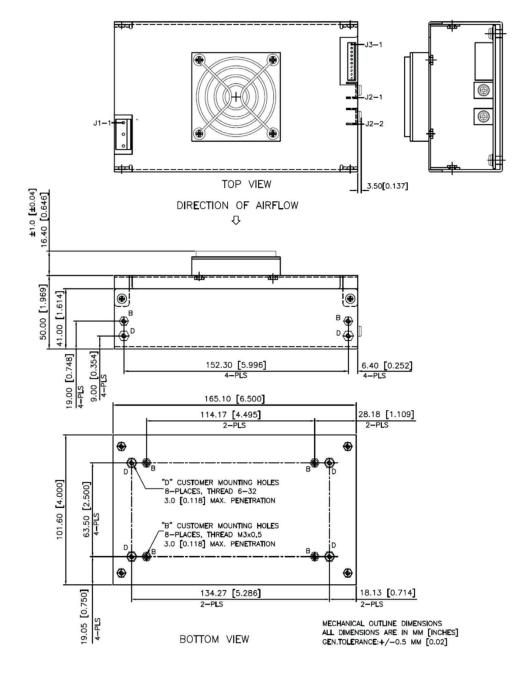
Mechanical Drawing (With Top Fan Mounting)
